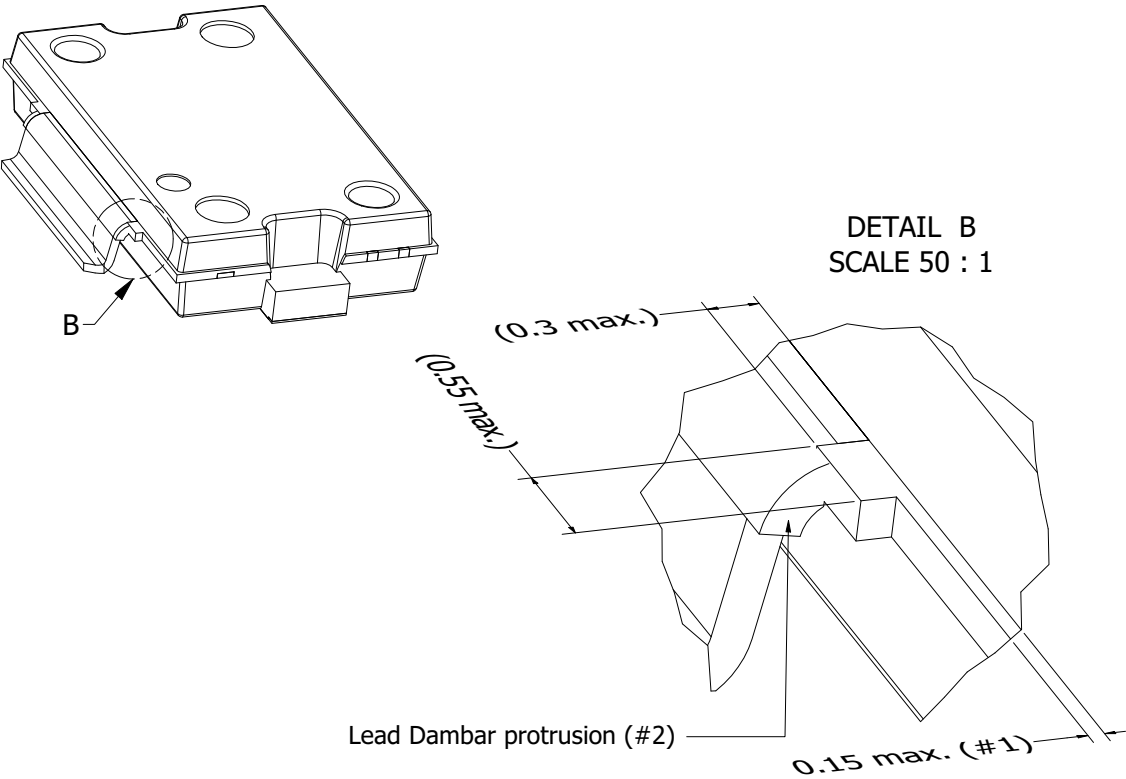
Package outline TO-270-2G-1 (sheet 1 of 2)
